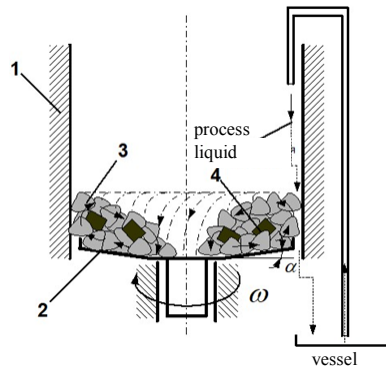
Centrifugal rotary machining flowchart: 1—cylindrical shell; 2 — rotor;
